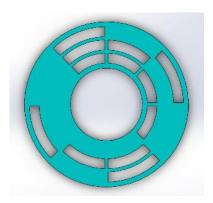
(b) Absolut Encored Wheel is special encoding wheel that used several IR sensors to indicate direction as a binary number.
